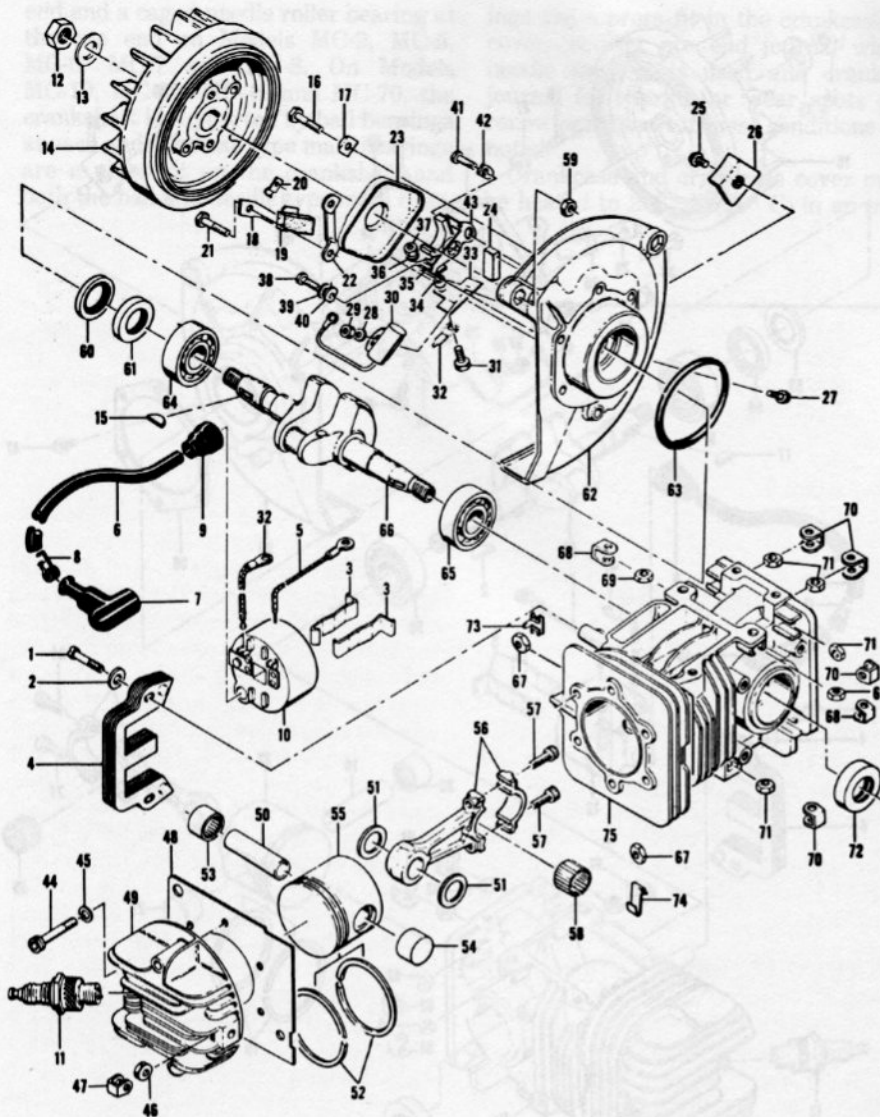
Exploded view showing construction of Models MC-20, MC-30, MC-40 engines. Model MC-45 is similar except for nine-port crankcase. Model MC75 is also similar except for nine-port crankcase and gasket is used instead of "O" ring (63).
